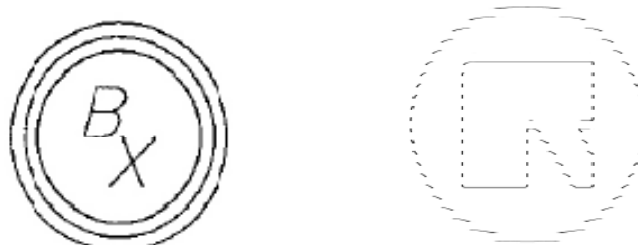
GYP-FAST™ FASTENER HEAD MARKINGS
